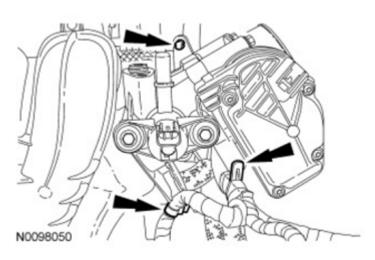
Locating Wire Harness Pin-Type Retainers Courtesy of FORD MOTOR CO.
